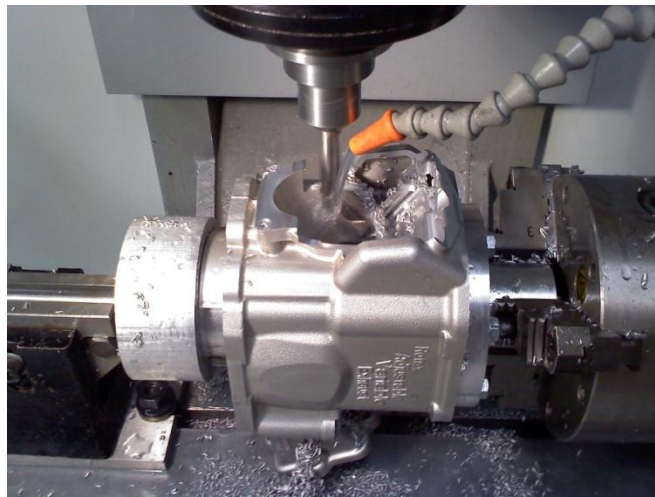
SCT Cylinder – Machining Process for Welded Insert.
